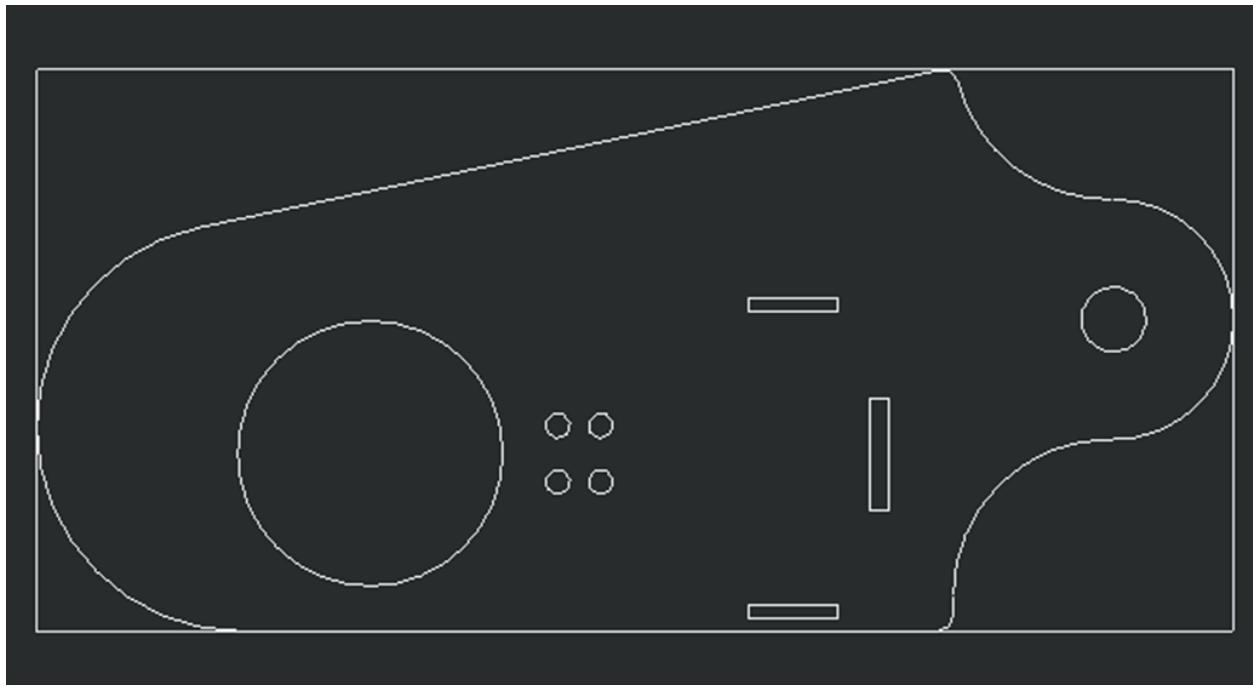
Early CAD Drawing of Mechanical Design using TinkerCAD
